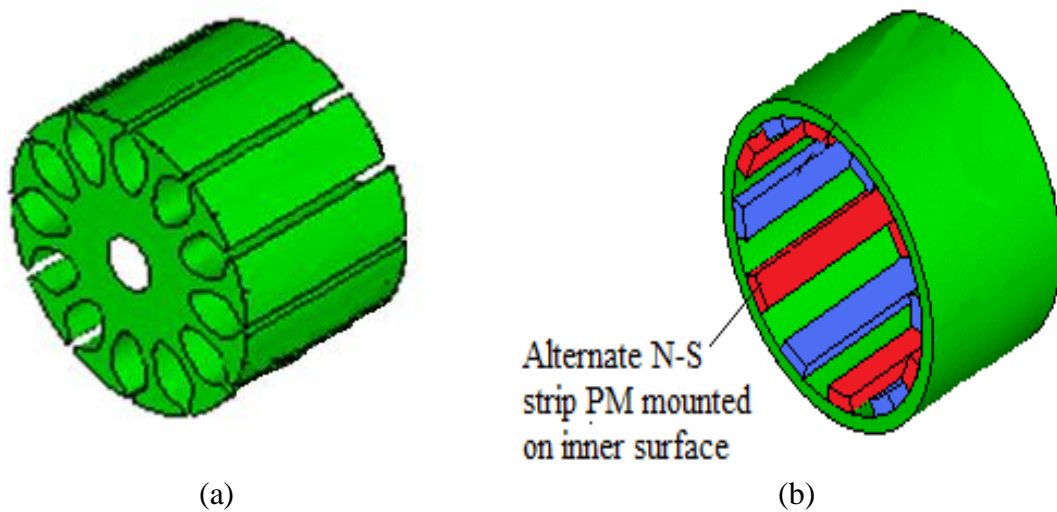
(a) Inner stator (windings not shown for clarity) (b) Outer Hub Rotor
